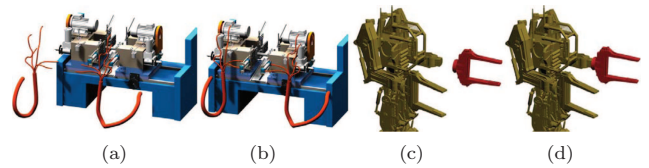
Tooling. (a) Disassembly result. (b) (c) Assembly process.
